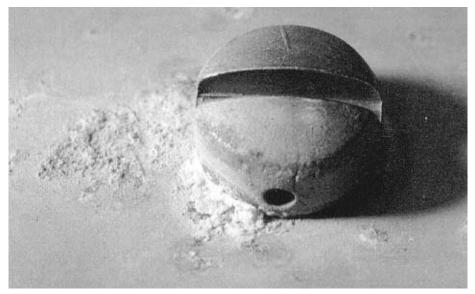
Galvanic Corrosion between a Stainless Steel Screw and Aluminum²
